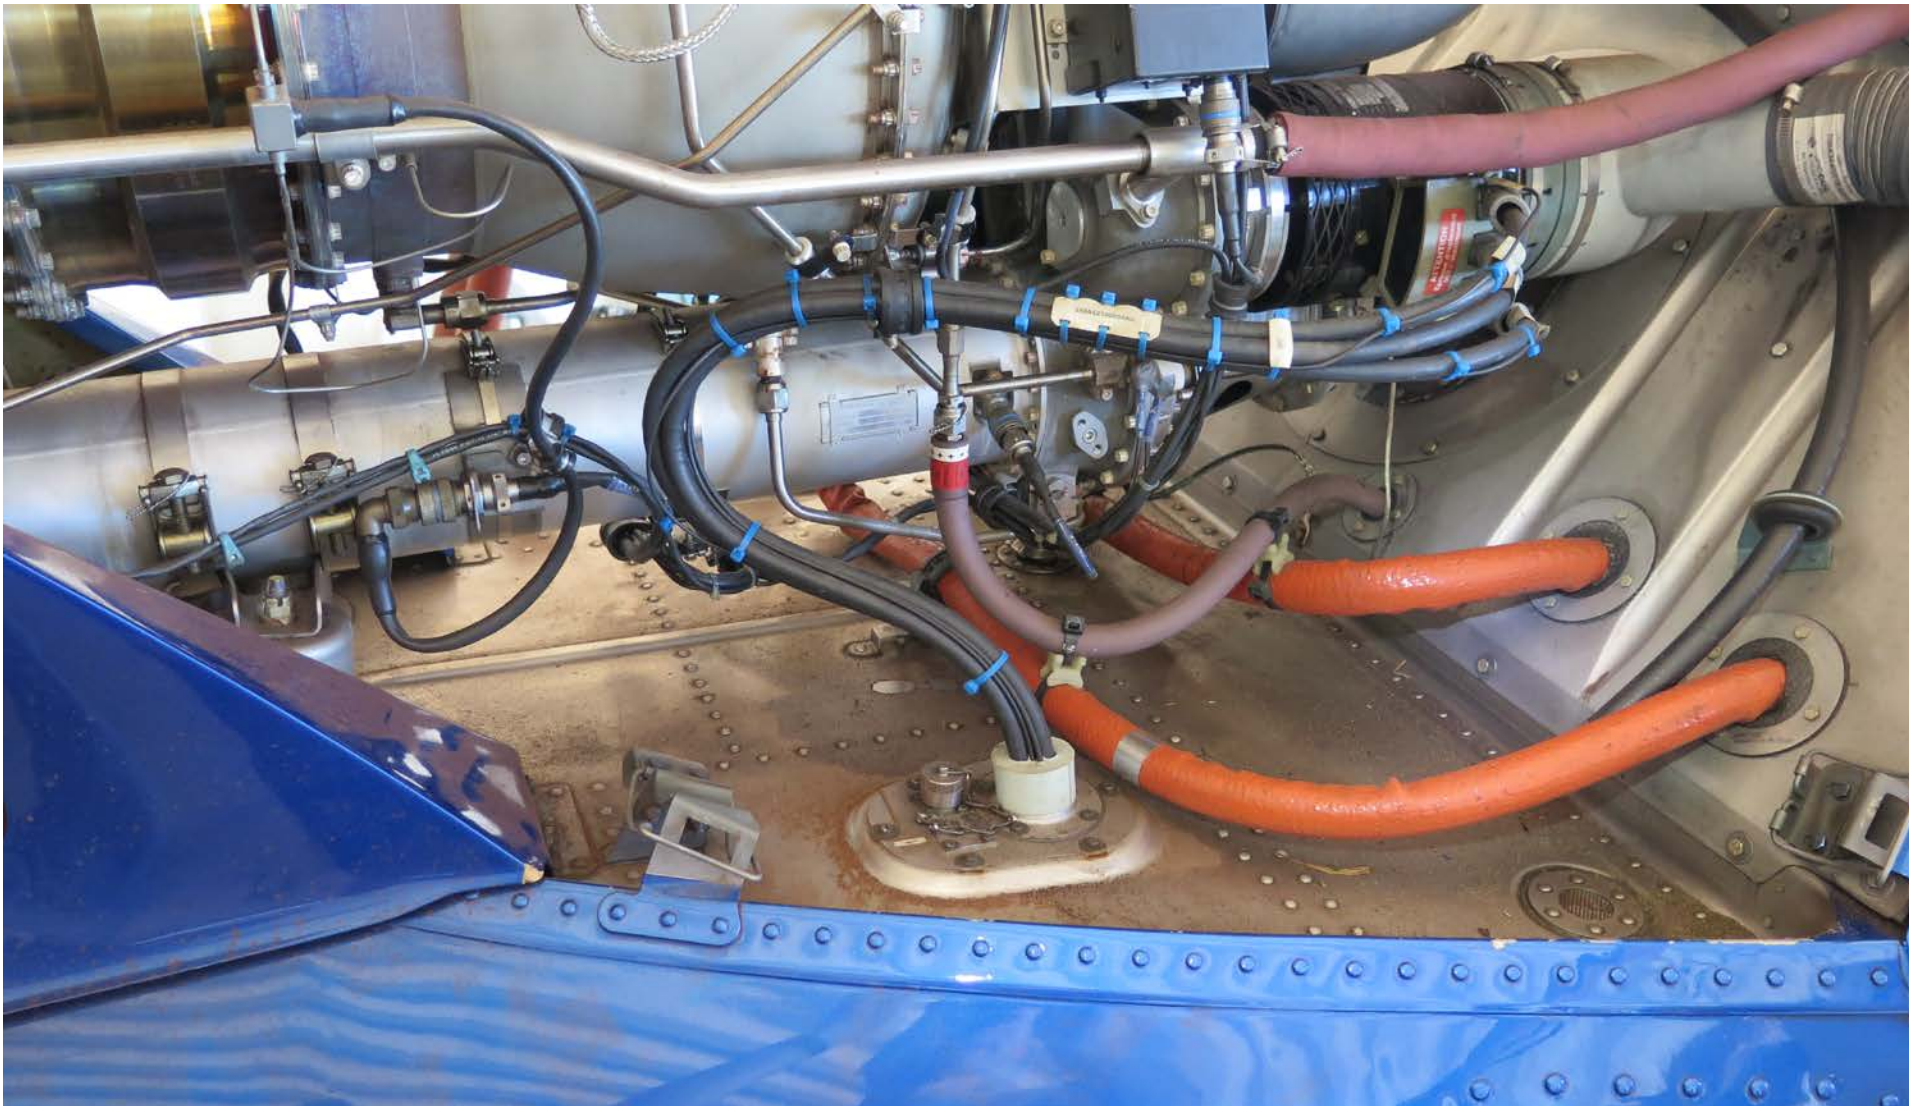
Photo of the starter-generator attached to the engine and the condition of the engine deck with no dark-oily substance deposited on the engine deck below the starter-generator.
